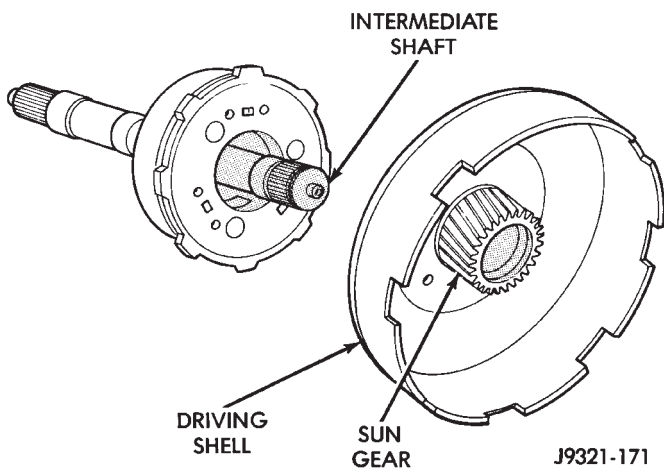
Sun Gear And Driving Shell Assembly Removal (46RH)
